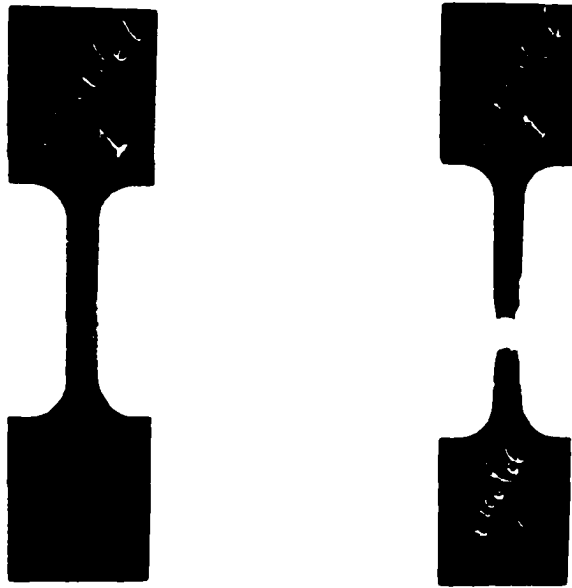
Web samples of HPS70W for uniaxial tensile tests - Parallel to rolling direction
